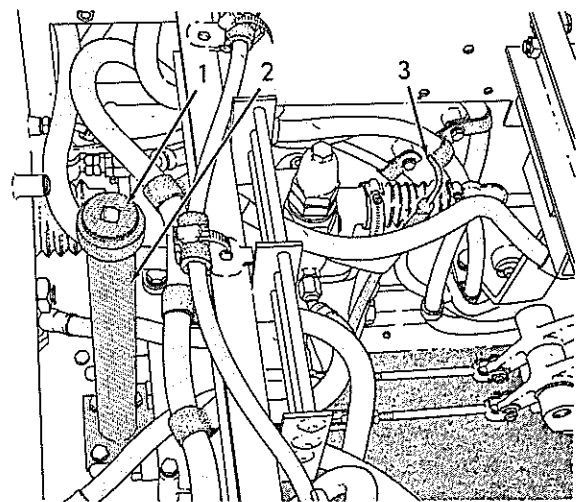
Oil Filler Pipe and Oil Level Gauge Rod
